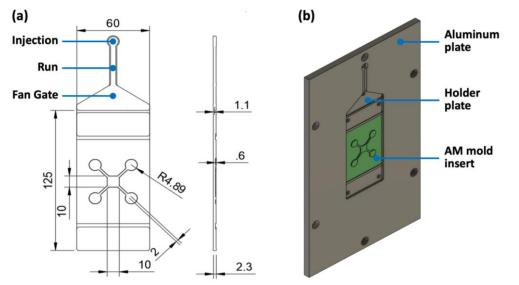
Manufacturing components and device design. (a) Detail of the holder plate and molded insert with the device geometry (top and side views); dimensions in mm. (b) Schematic of the assembled plate.
